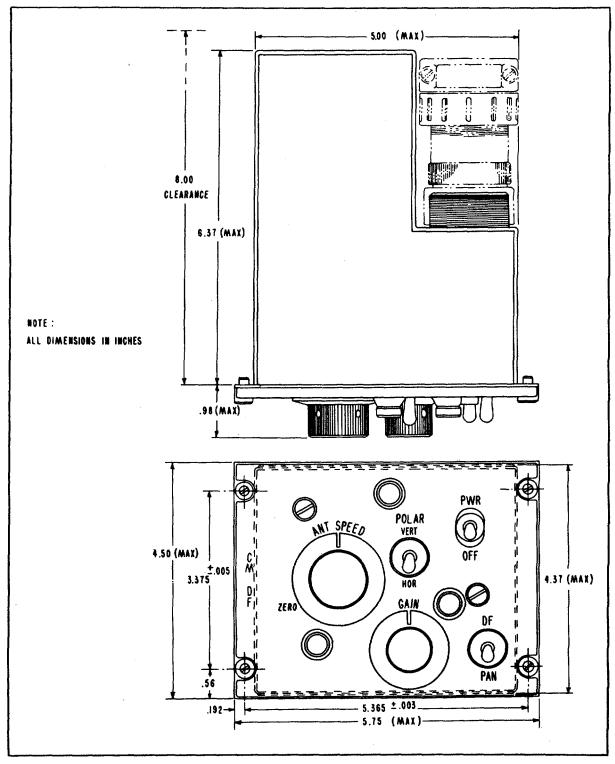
Direction Finder Control C-527/APA-69, Outline and Mounting Dimensions
